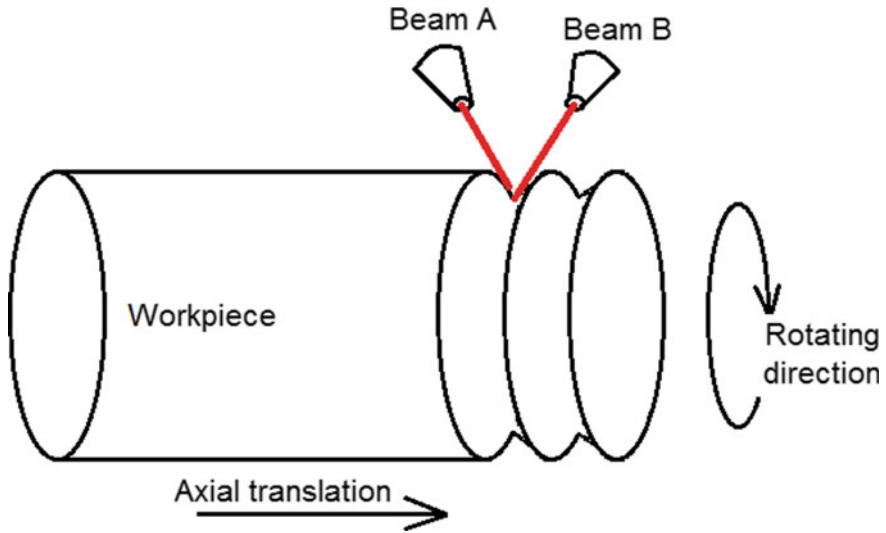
View of utilizing two intersecting lasers for bulk material removal
